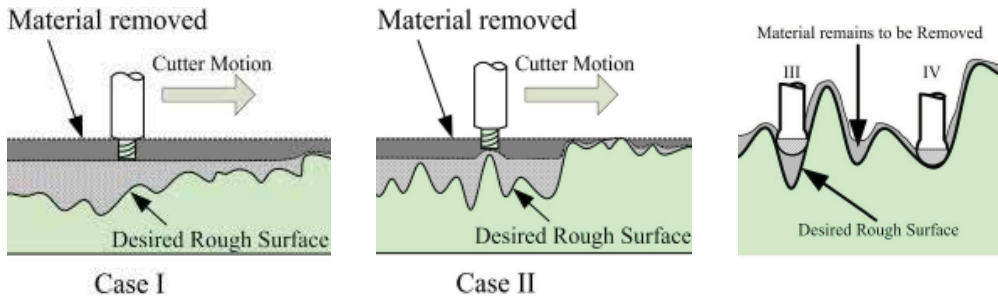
(a) Coarse machining process for the rough surface. For Case I, the full cutting edge is used to remove material; for Case II, the cutter is lifted upward 1 mm to avoid overcutting the surface. (b) Fine machining process for the rough surface. For Case III, the radius of the cutter is larger than the curvature of the valley so an undercut is encountered, as opposed to Case IV where the cutter reaches the desired surface.
